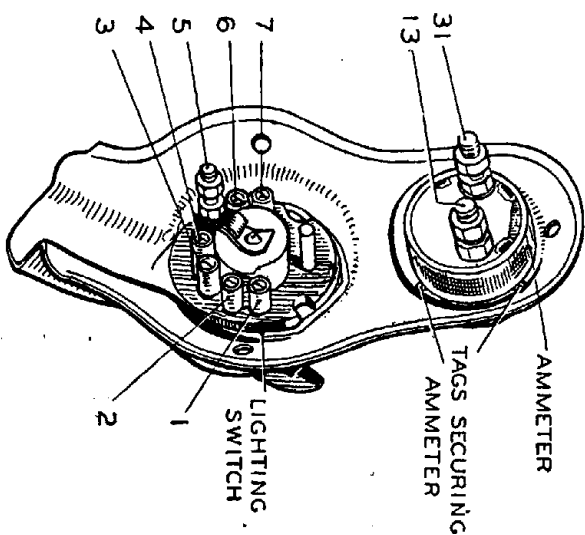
AMMETER AND SWITCH PANEL ON HEADLAMP.
